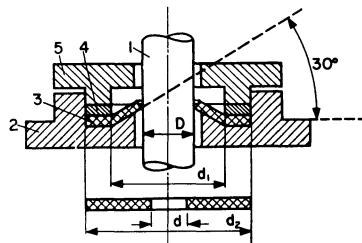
Shape and dimensions of a Wilson seal: (1) shaft; (2) base plate; (3) rubber washer; (4) metal ring; (5) lock nut
